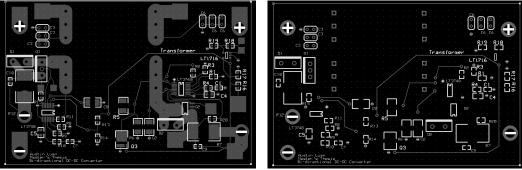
Top Layer with Silkscreen and Bottom Layer of PCB
